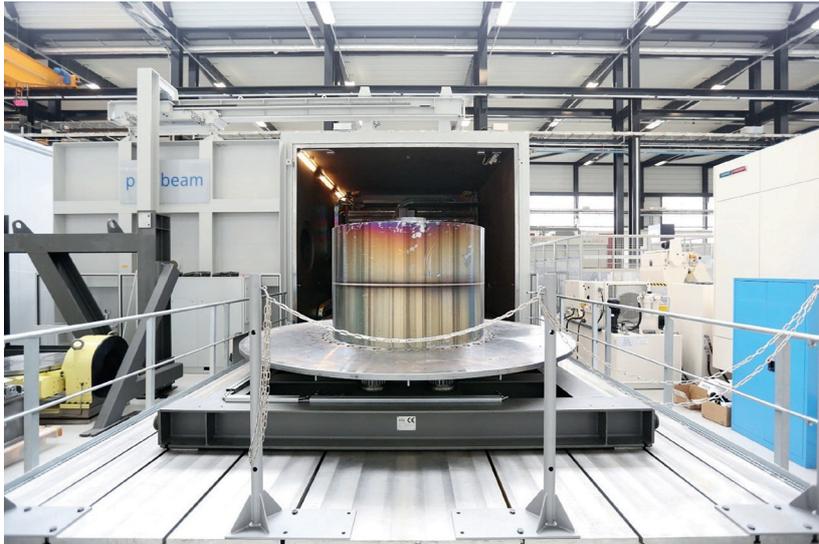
Electron beam welding of SA508 Gr3.Cl 2 steel (NAMRC)
